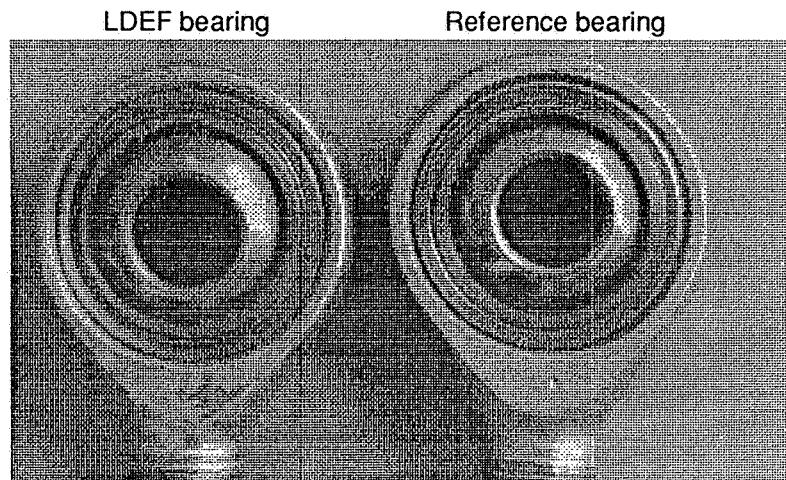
Side View of a Rod-end Bearing Flown on LDEF and a Similar Off-the-shelf Bearing.
